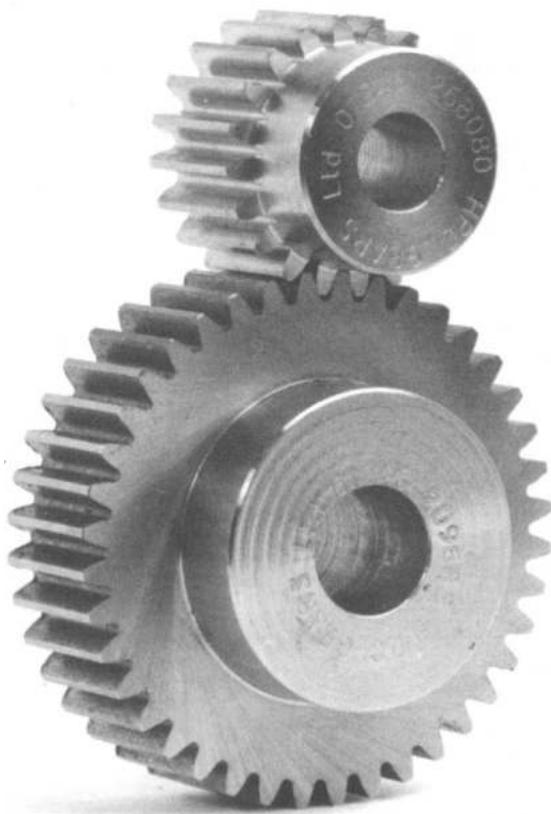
Spur gears. Part of a set of 40 Helix 158080 Precision Components Ltd.
